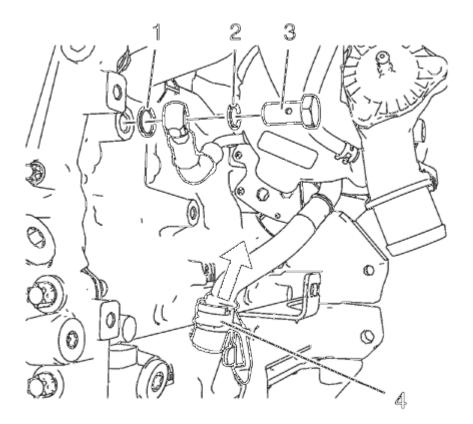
Turbocharger Assembly And Turbocharger Gasket Courtesy of GENERAL MOTORS COMPANY
